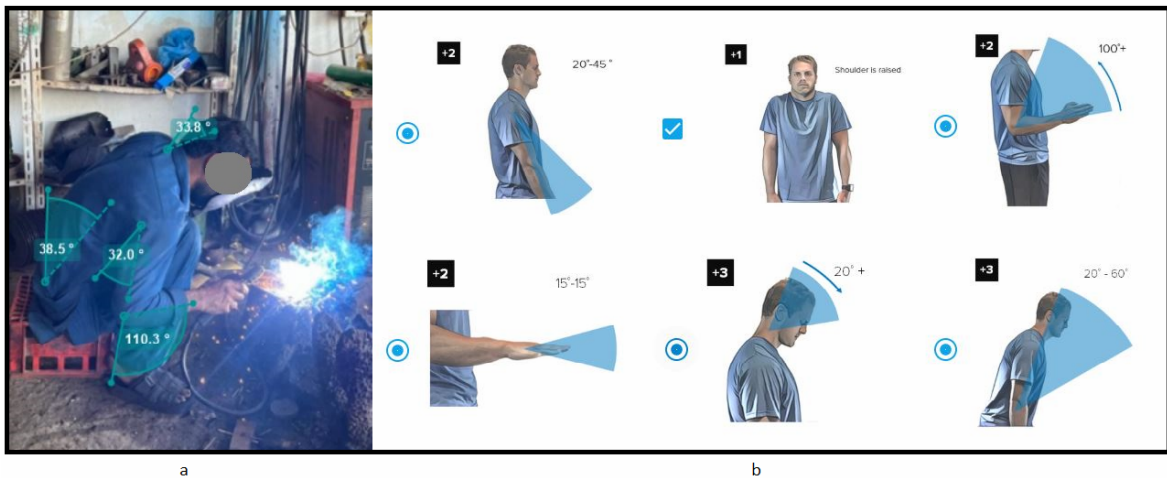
(a) An operator performing a welding task (b) RULA assessment - welding task
